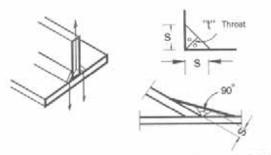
Dimensions of Size and Throat of Fillet Weld
